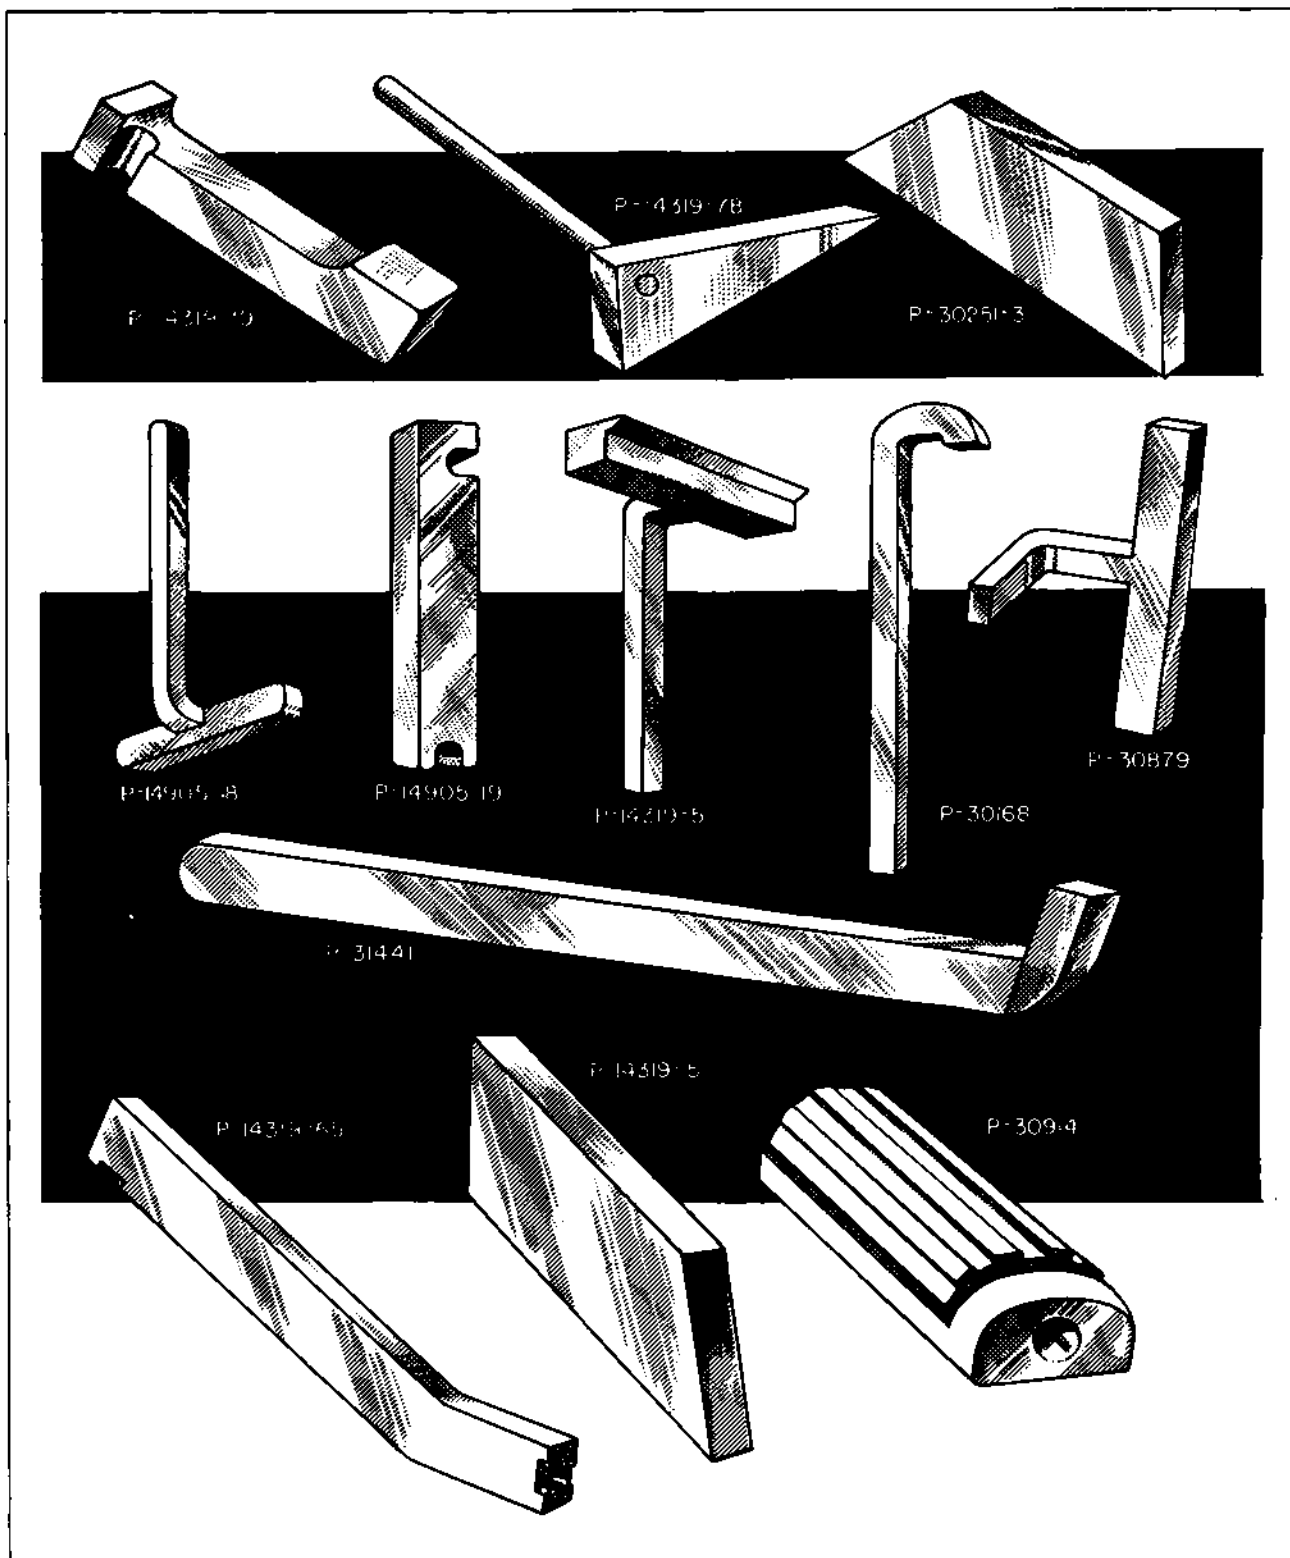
(SHEET 2 of 4 SHEETS)—SPECIAL TOOLS—BUCKING BARS
